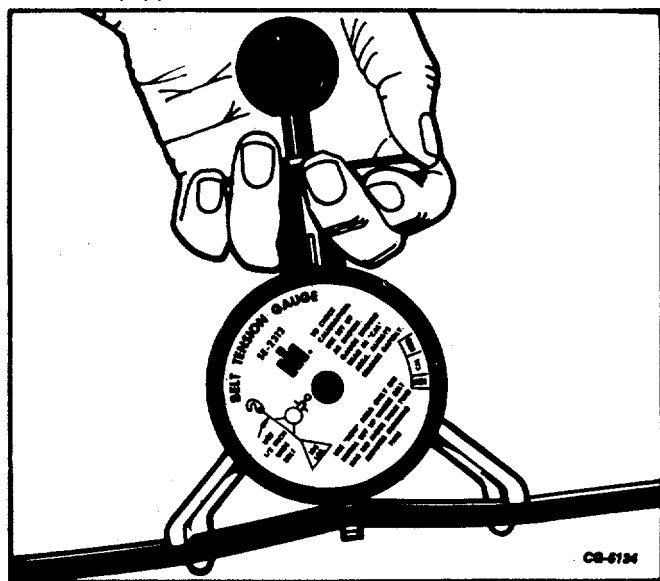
Checking Belt Tension With SE-2312 Gauge
